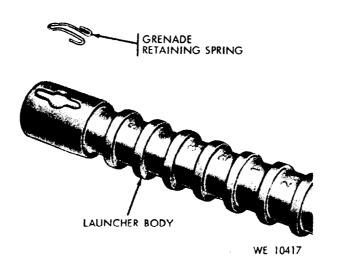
Disassembly/assembly of grenade launcher M7A3.
